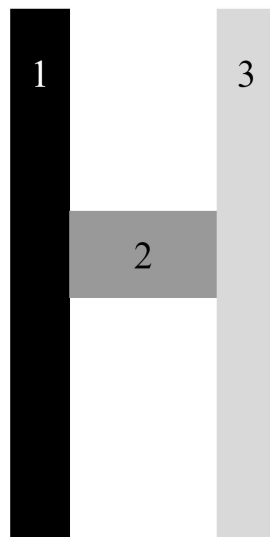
The cross section of the stiffening ring shows what section corresponds to which manufacturing procedure.
